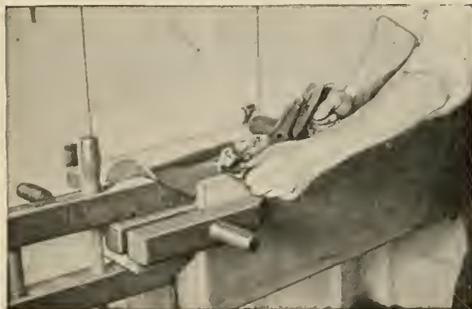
How the hand screws are placed on the kitchen table bench for planing wide boards.
